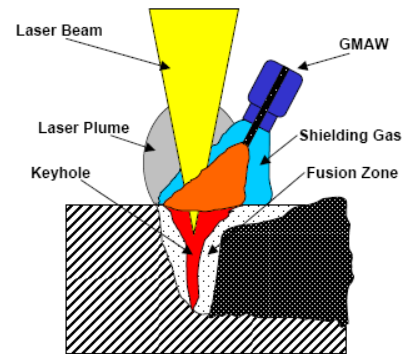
(d) Laser Arc Hybrid Welding (Laser + GMA)
